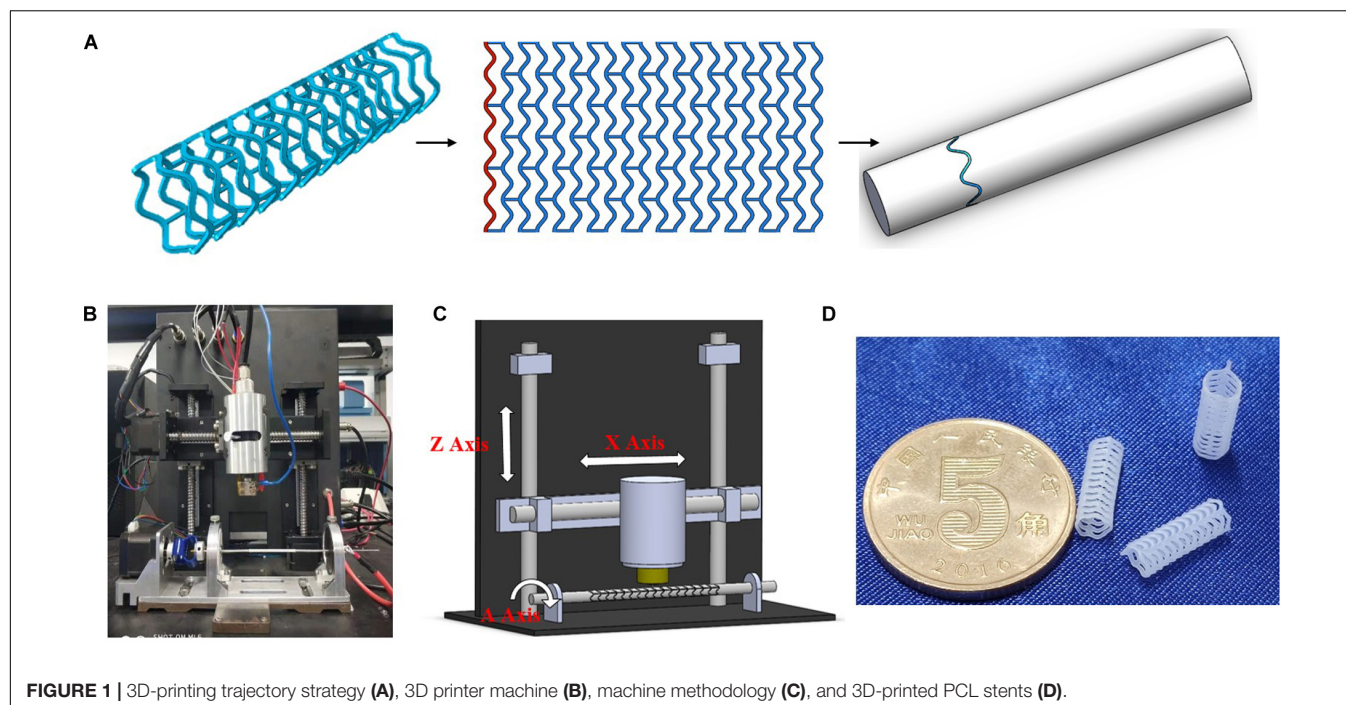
| 3D-printing trajectory strategy (A), 3D printer machine (B), machine methodology (C), and 3D-printed PCL stents (D).
